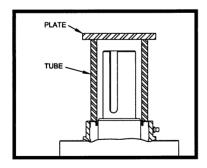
Preparation for Final Installation of Inboard Seal
